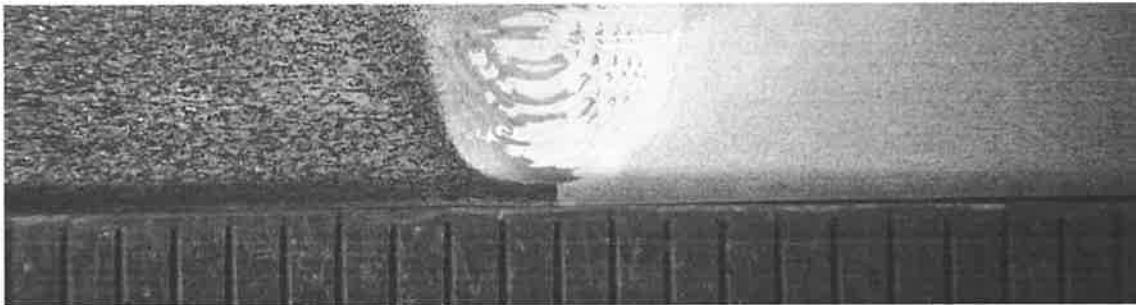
Dissimilar alloy friction stir weld where the 6056-T4 (dark alloy) has been placed on the advancing side and the 7075-T651 (light alloy) on the retreating side [128]
